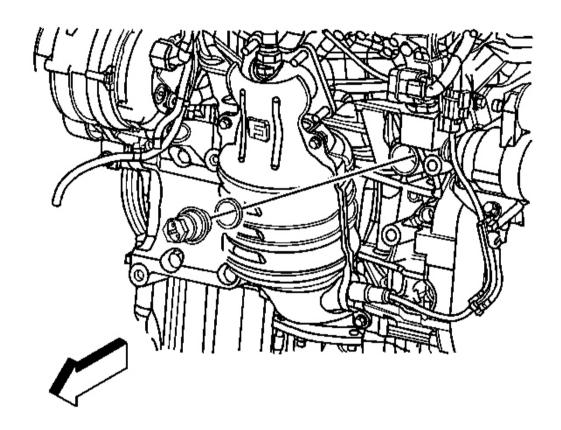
View Of Coolant Heater (L66) Courtesy of GENERAL MOTORS CORP.
